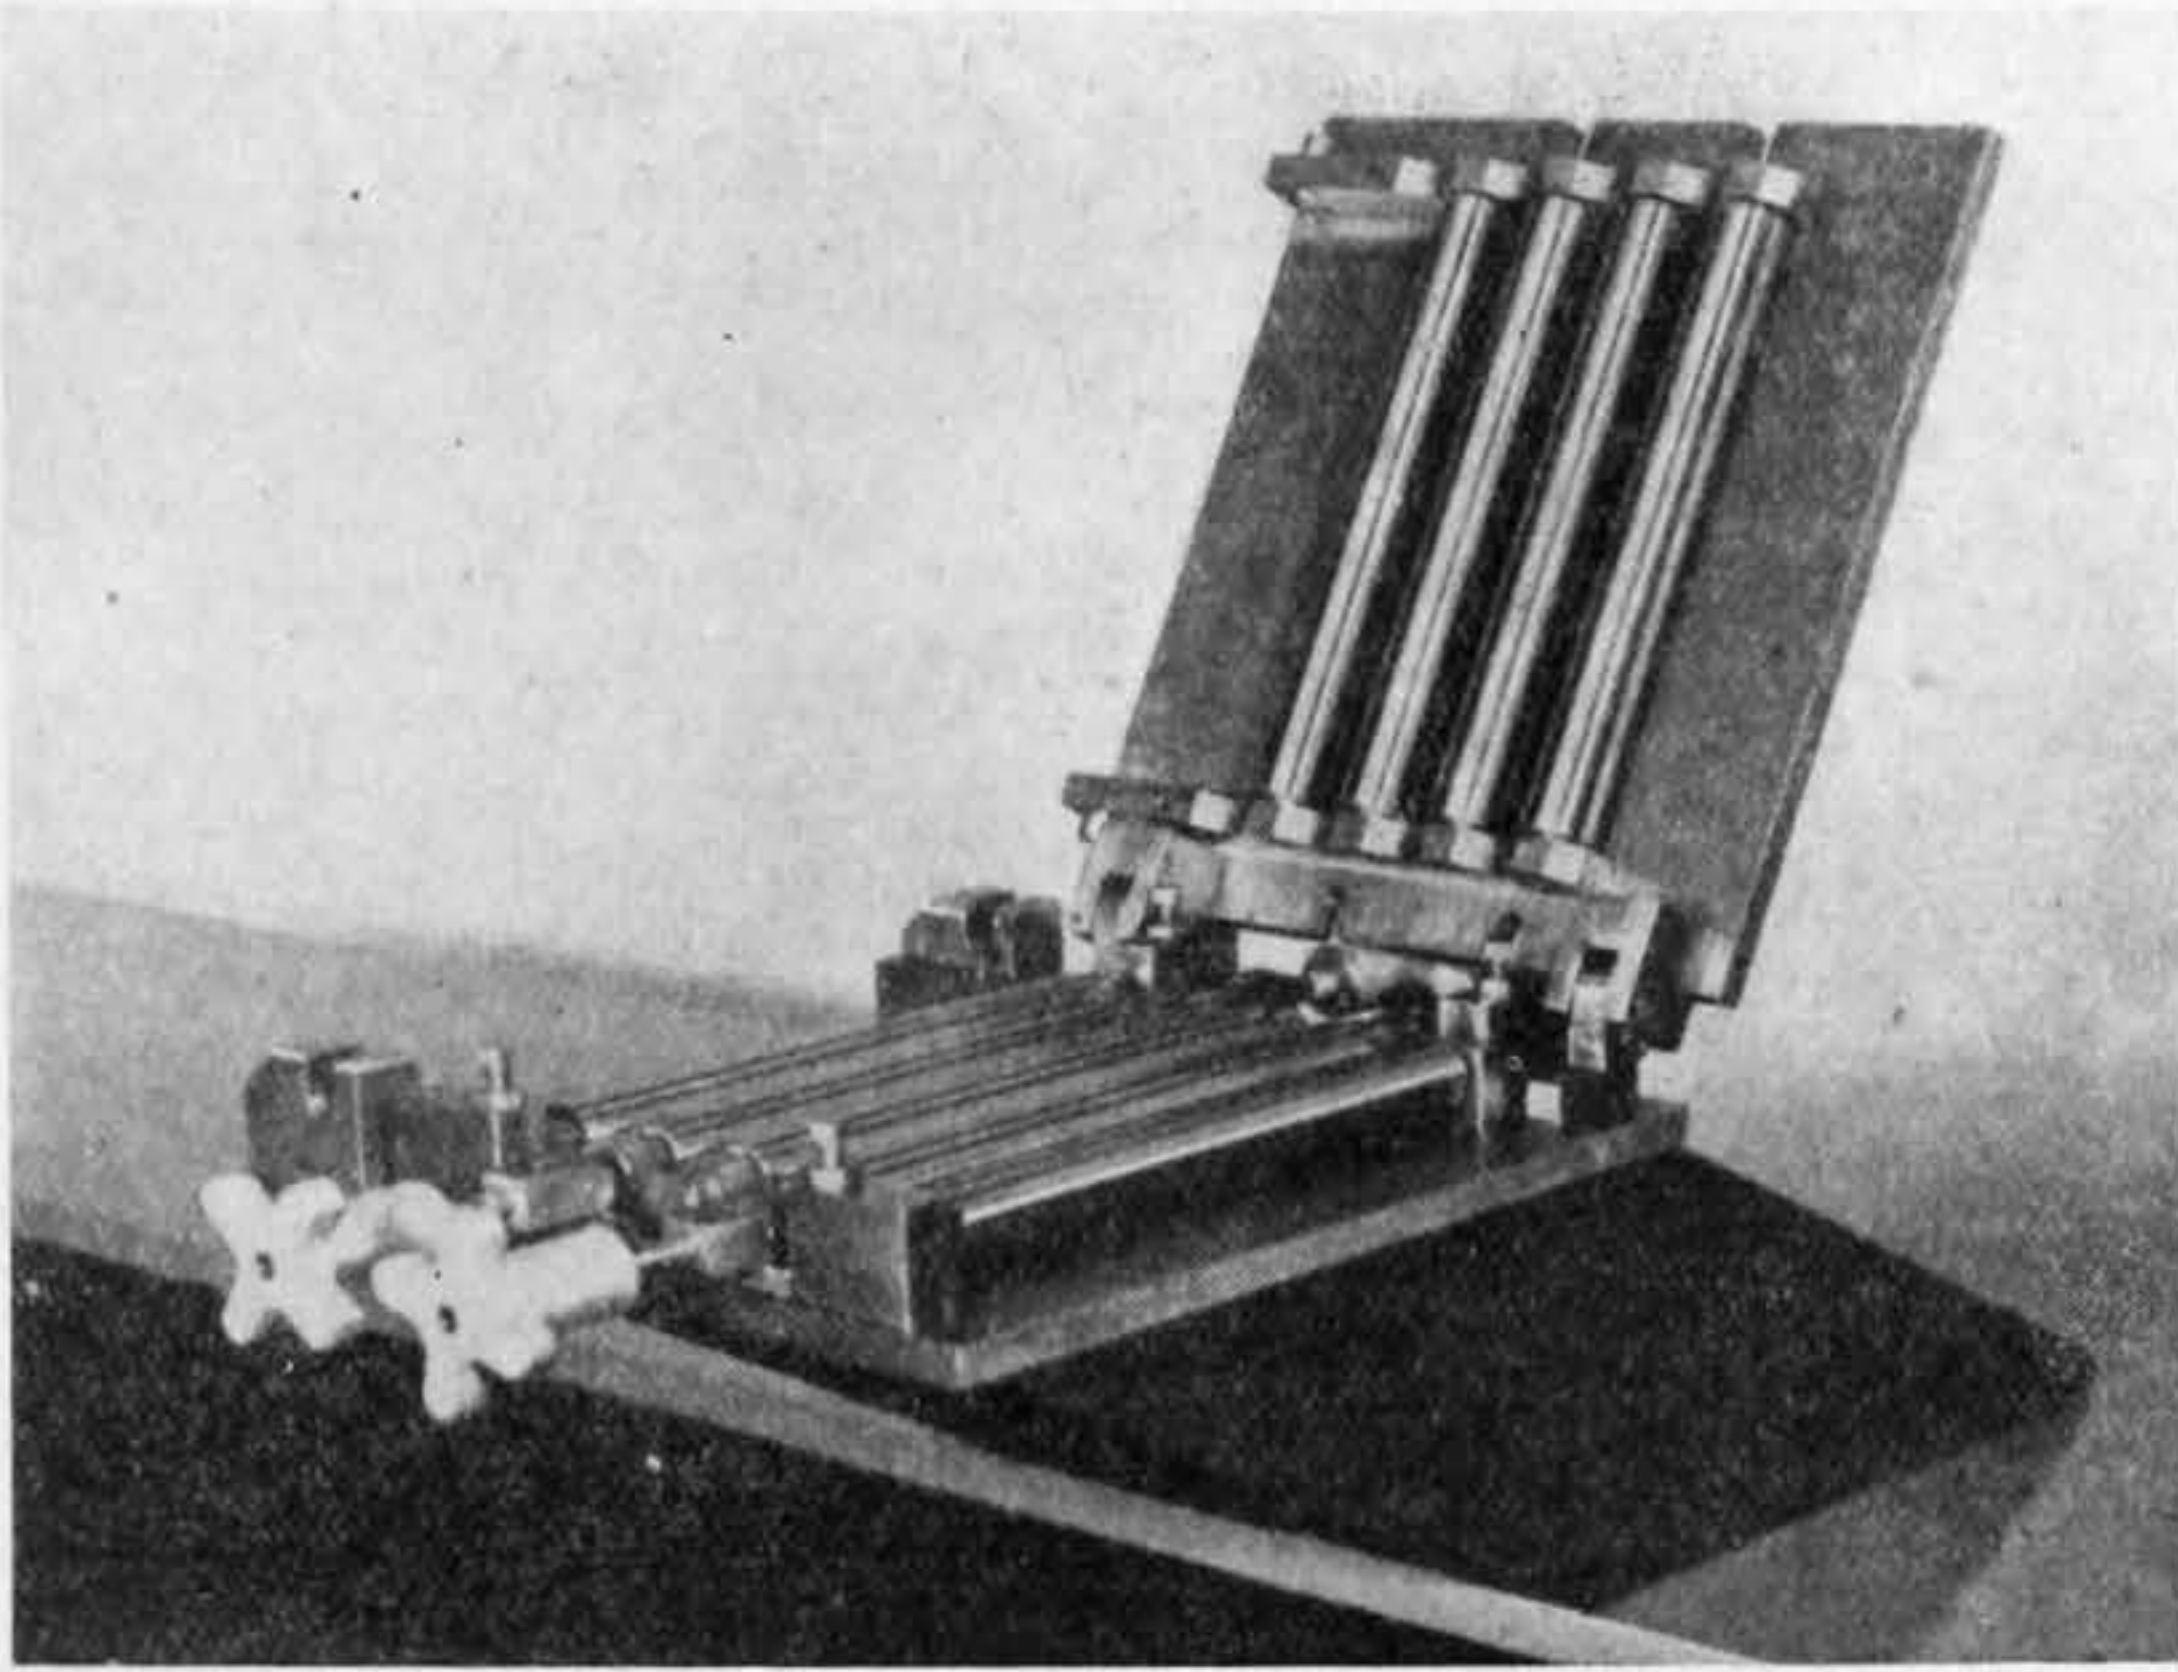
Pull-through roller leveller mounted on slitting machine between cutters and recoiler
